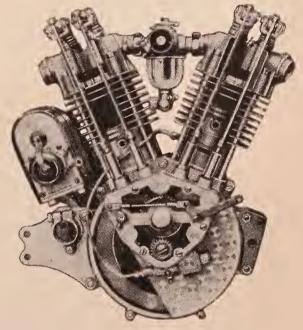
Pope Twin Motor with Overhead Inlet and Exhaust Valves
